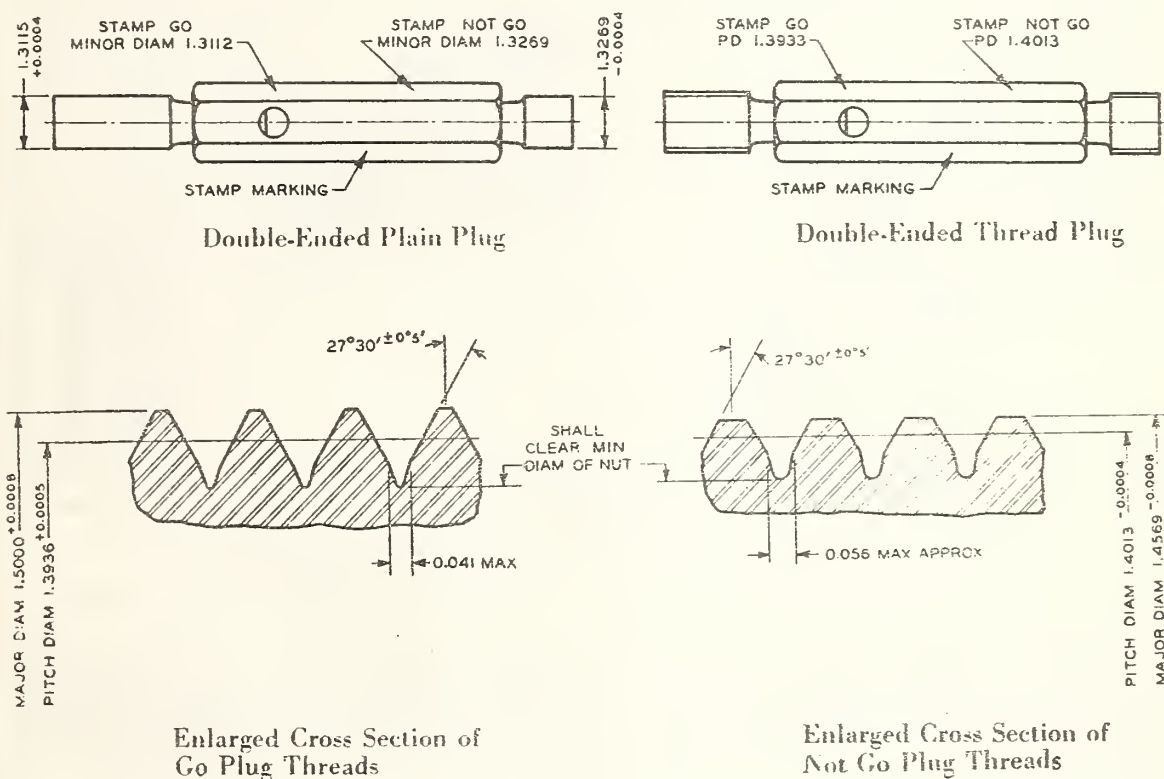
Double-ended plain and thread plug gages for checking screw threads of Truncated Whitworth form; nominal diameter $1\frac{1}{2}$ inches; 6 threads per inch; class 2 tolerance.
